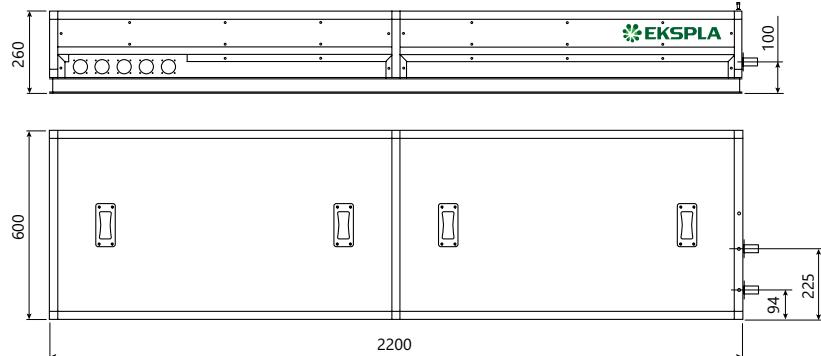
NanoFlux N10k10-AWG laser head outline drawing (actual dimensions might vary)
